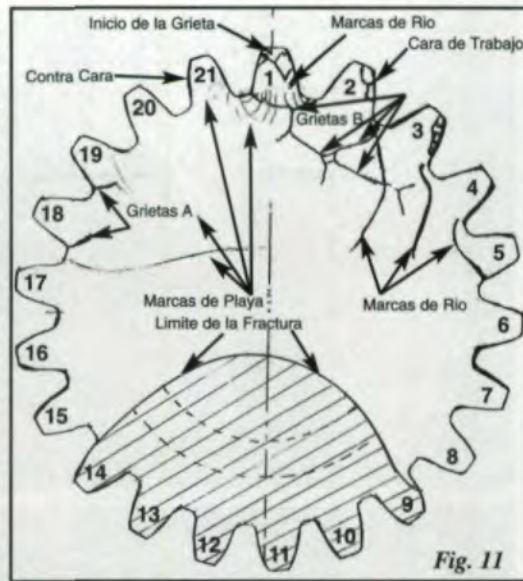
Pinion fracture face. Mating surface shown in Figure 12.
